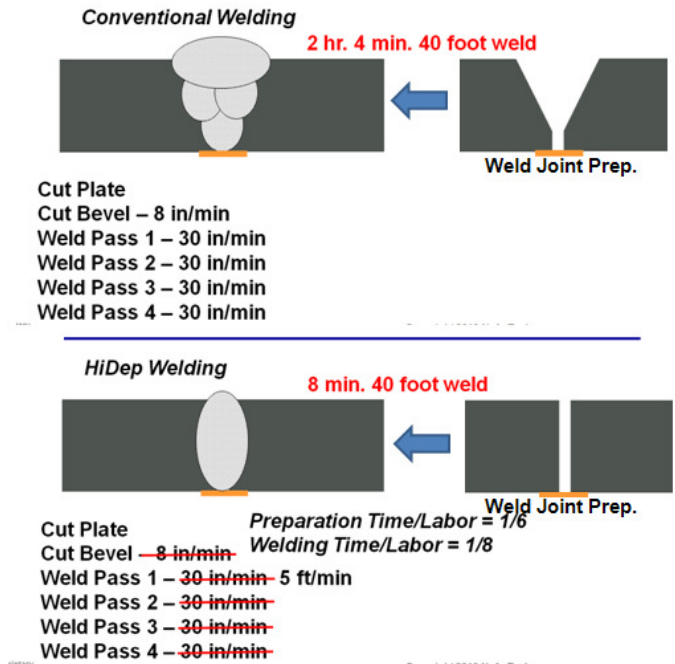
Comparison of HiDep weld using the portable robot versus conventional field weld using a crawler type weld torch holder.
